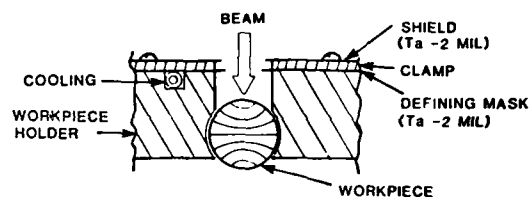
Collimator mask designed to minimize edge sputtering onto workpiece with thin foils.
